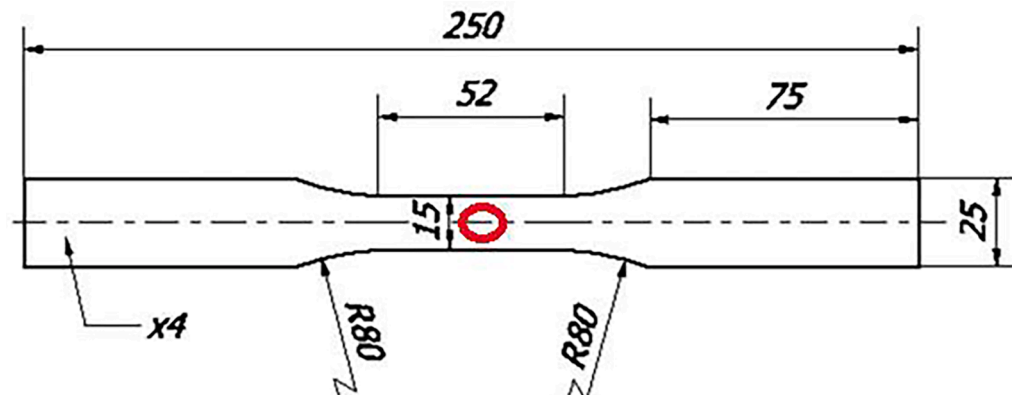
Engineering drawing of the coated sample with the marked EC measurement area.
